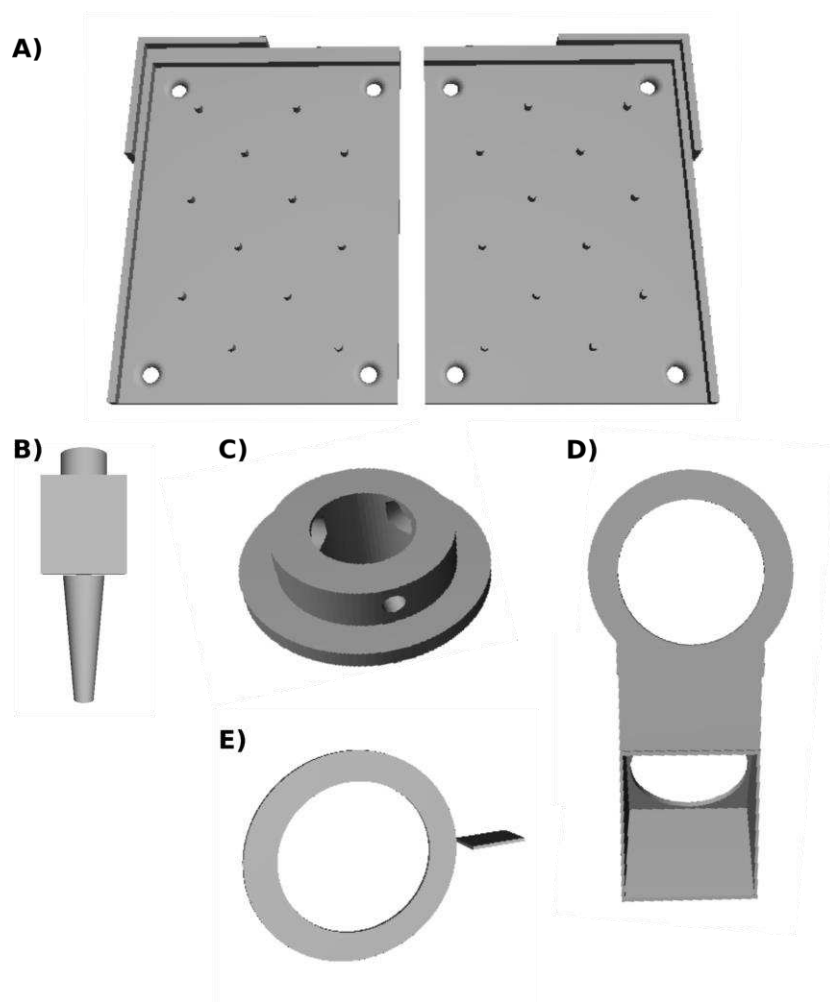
Drawing of the 3D printable parts as uploaded on Zenodo and Thingiverse (see data sharing section in main document). A) Paper holder, designed for one DIN A4 paper (needs to be printed twice). This holder keeps the μ PAD in place and elevates it to facilitate drying. Can be installed on the bench surface of the milling machine. B) Spotter head, designed to lead the capillary. The upper part is designed to hold a crimped capillary fitting. C) Inner ring, which holds B) in place. Three holes can be equipped with screws to hold B) in place and to finetune its position. D) Angled fan holder, optional part, can be equipped with a small computer fan to speed up drying of the mobile phase while spotting. Should be installed under C). E) Optional part: a small ring that can be placed beneath part D) and secured using the flap in the small opening of the milling machine holder (see Fig. S2, orange part—gap secured with a screw). This prevents the spotter head from rotating within the milling holder.
